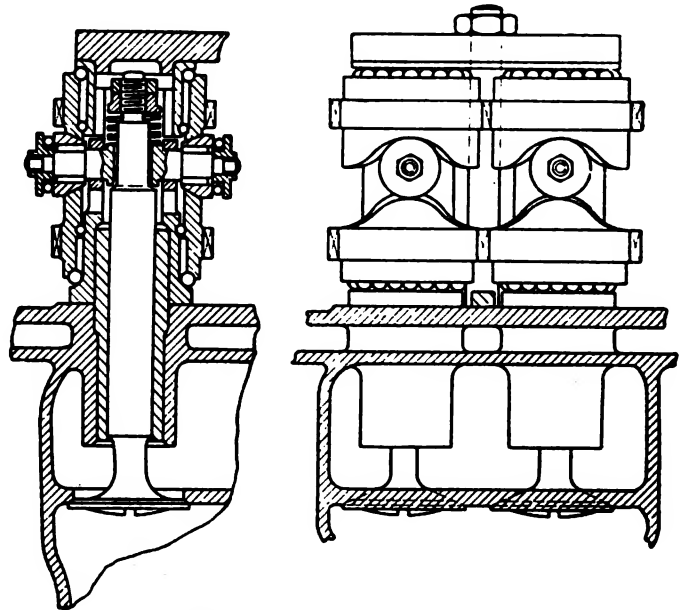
OVERHEAD CAM GEAR ON THE FIAT ENGINE
